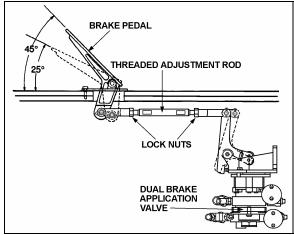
BRAKE PEDAL ADJUSTMENT
